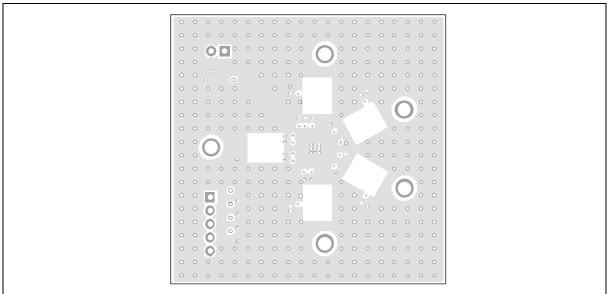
SL2150D evaluation PCB (Layer 2 view)
